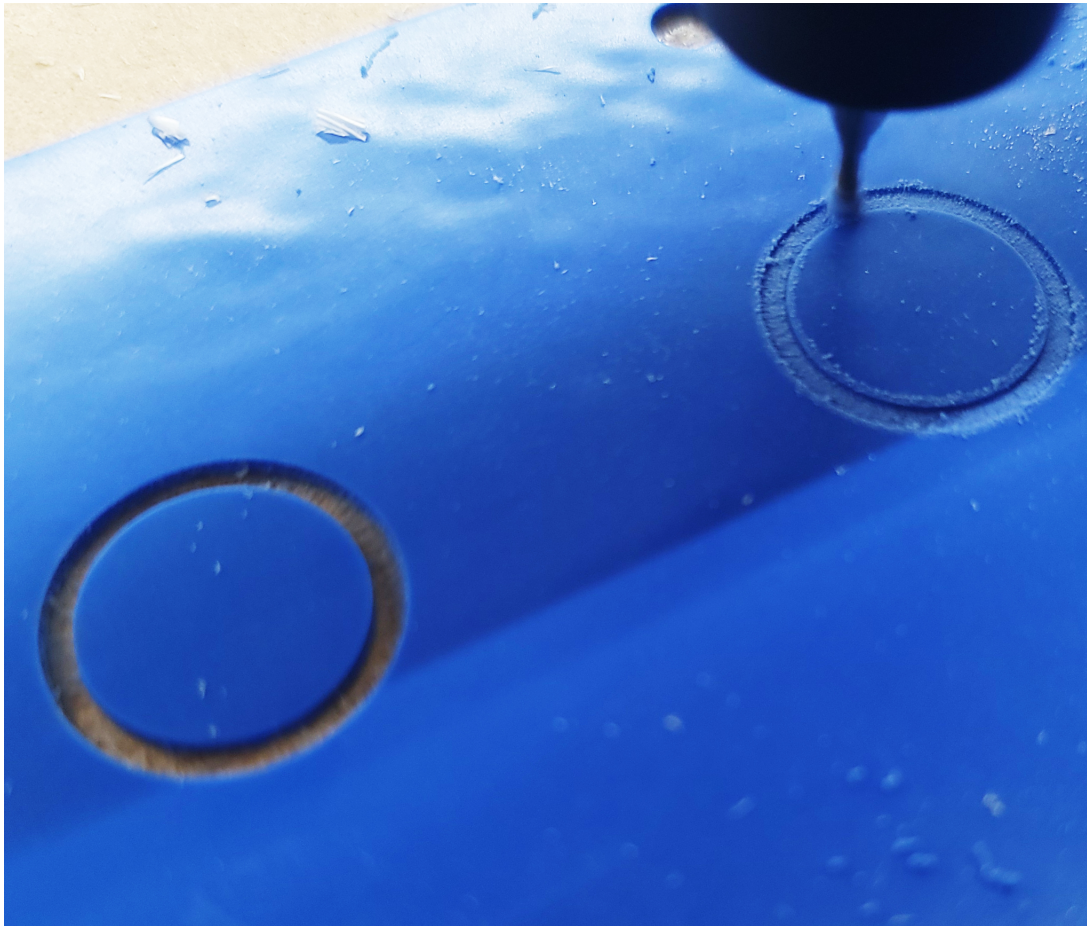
Fluorosilicone gasket milling Fluorosilicone gasket milling was achieved using a combination of shallow,  $<50\ \mu\text{m}$  passes and the use of a  $\frac{1}{16}$ " downcut geometry square single-flute endmill to minimize lifting forces. On the right, the endmill makes repeated shallow passes to remove material. On the left, we see the final appearance of the cut with precise geometry and smooth walls.
